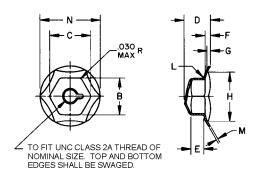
FORMED THREAD FACETED FLANGE TYPE STAMPED NUTS, in 1
